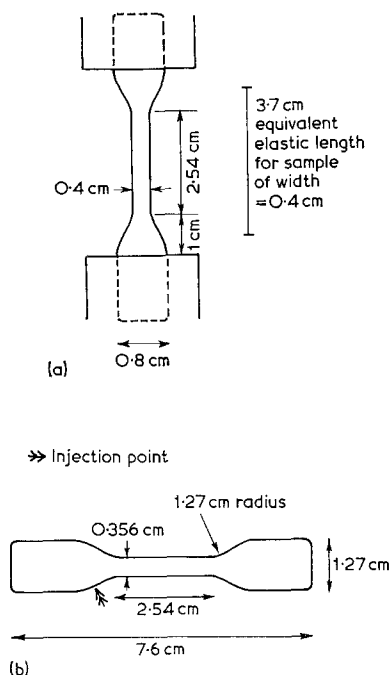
(a) Dimensions of sheet samples. (b) Dimensions of injection moulded dumb-bells.
